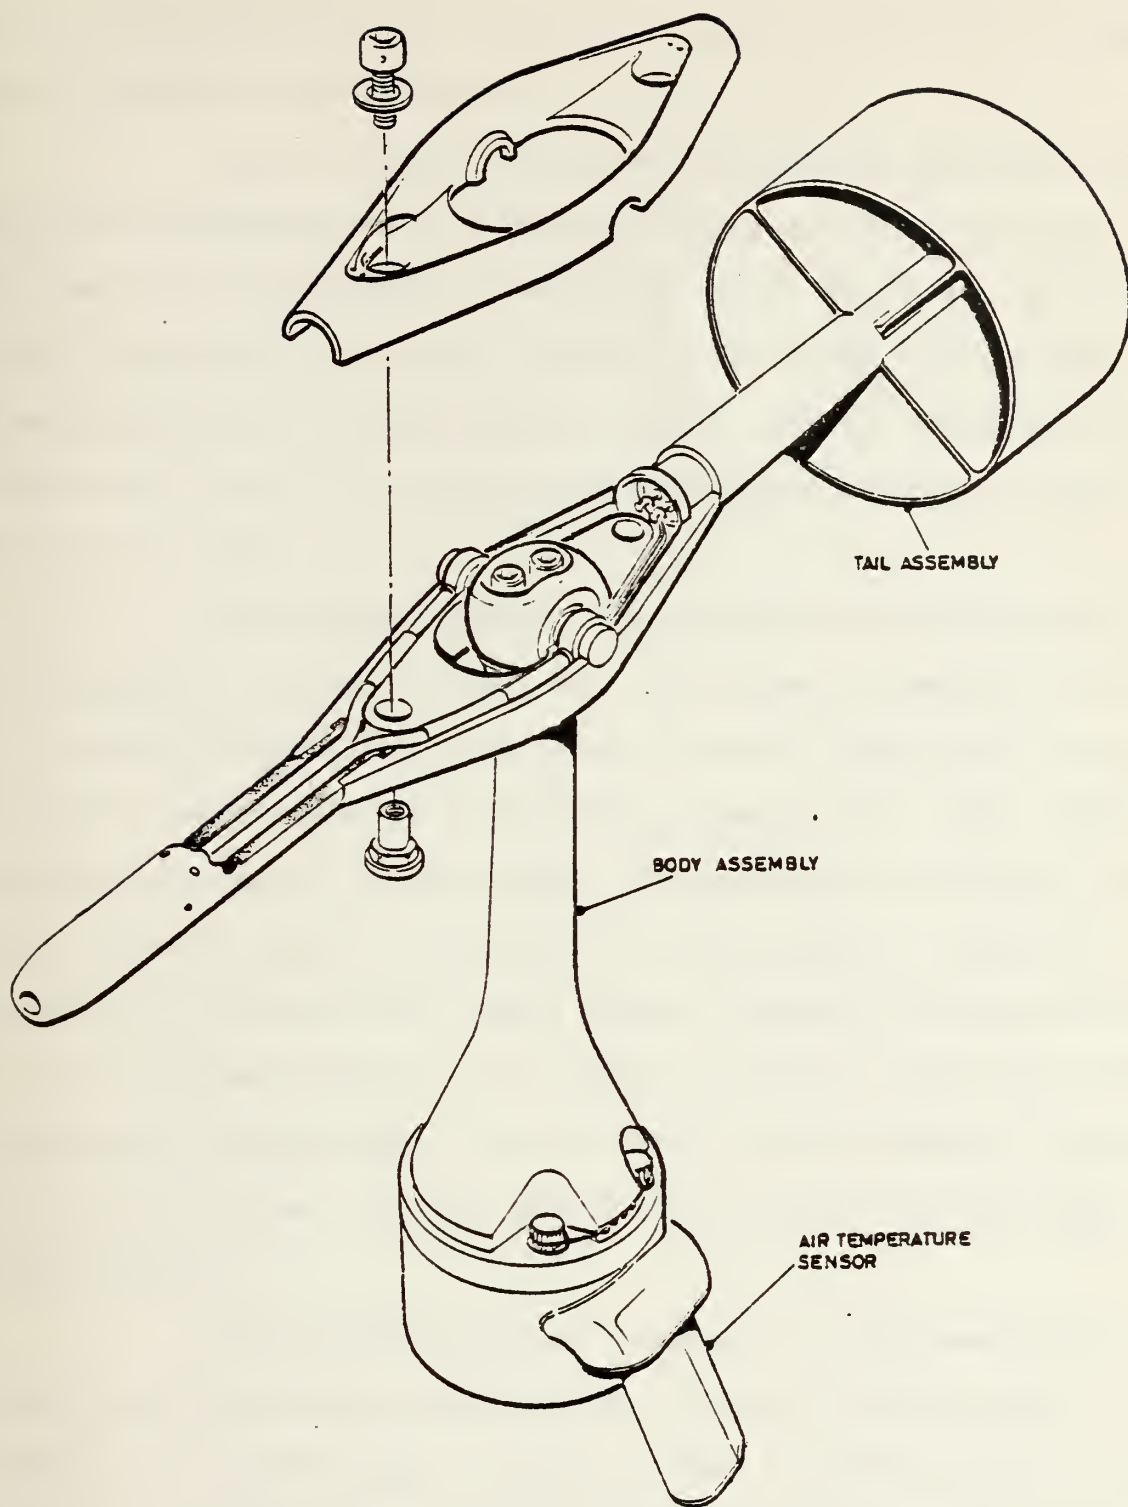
Exploded View of the Swivelling Probe Airspeed Sensor [10-11]
